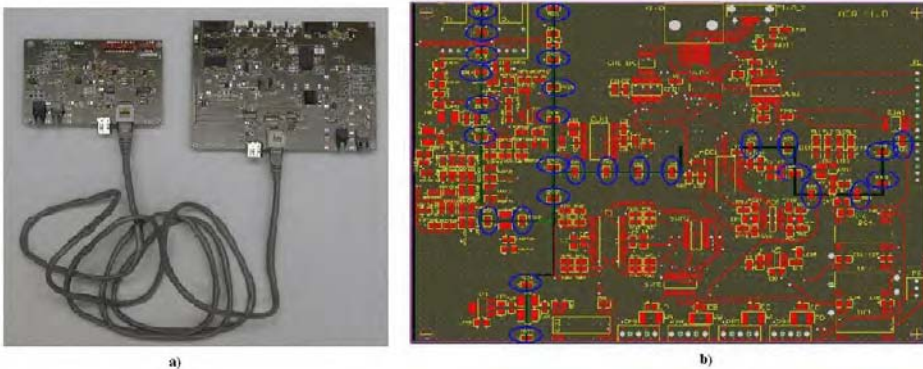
a) Measures acquisition and control PCBs; b) PCB layout: splitting vs partitioning
